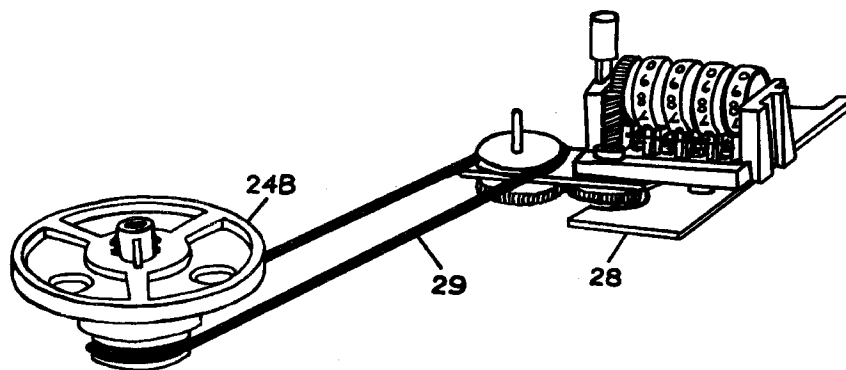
EXPLODED VIEW OF TAPE-DECK (PARTS LIST IDENTIFICATION)
